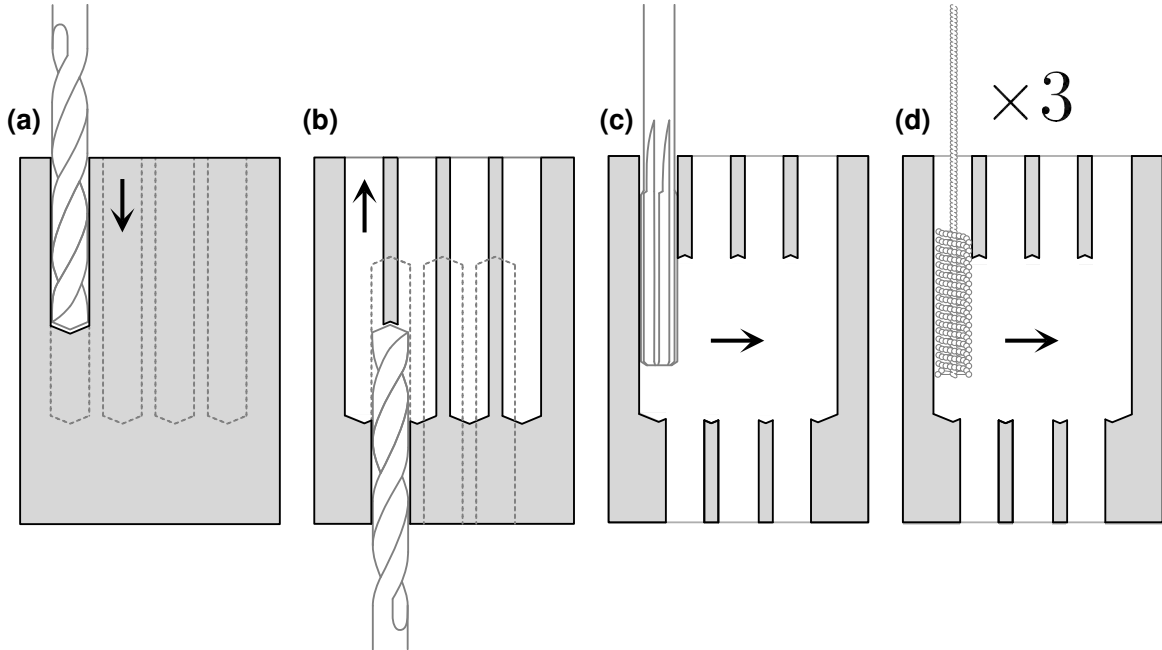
Flute cavity production steps: The steps involved in making a flute cavity. An initial drilling step involves drilling holes on either side, where the center-center distance of the opposing holes is less than the hole diameter. A subsequent reaming step brings the hole to its final size while also removing deeper surface imperfections from the initial drilling. Next, a series of homing steps smooth the surface further and soften sharp edges while removing burrs.
